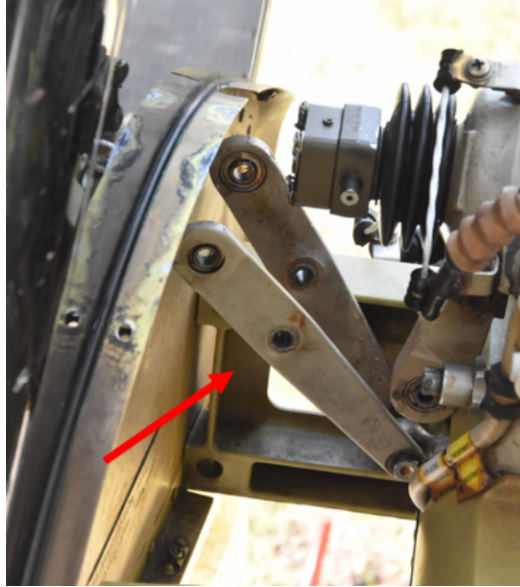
Tail rotor Pitch Change Lever Assembly. Red arrow points to area of missing bolt.
